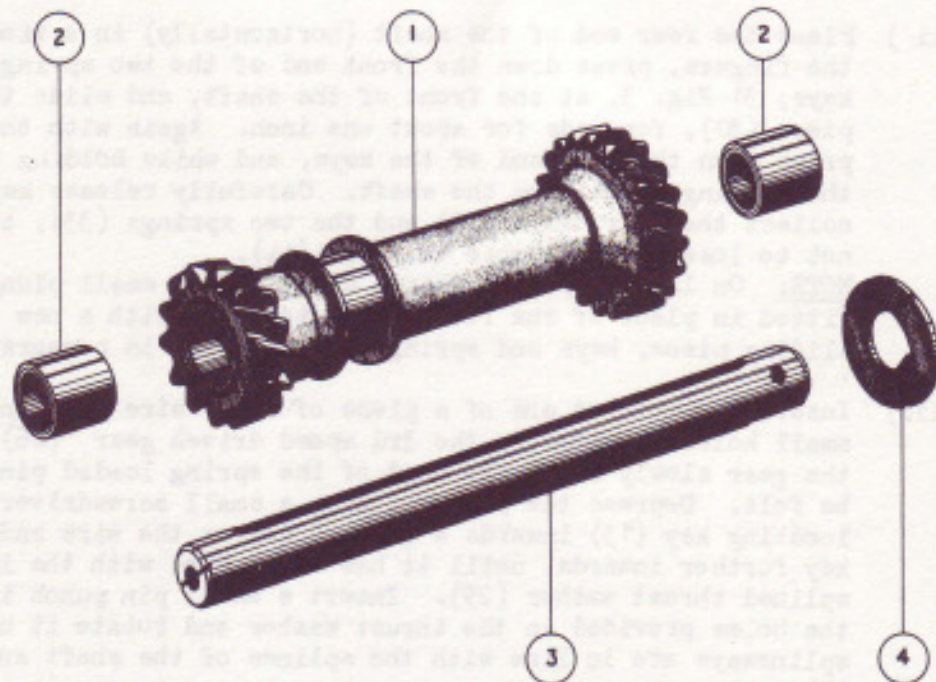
EXPLODED VIEW - REVERSE MOTION SHAFT.
